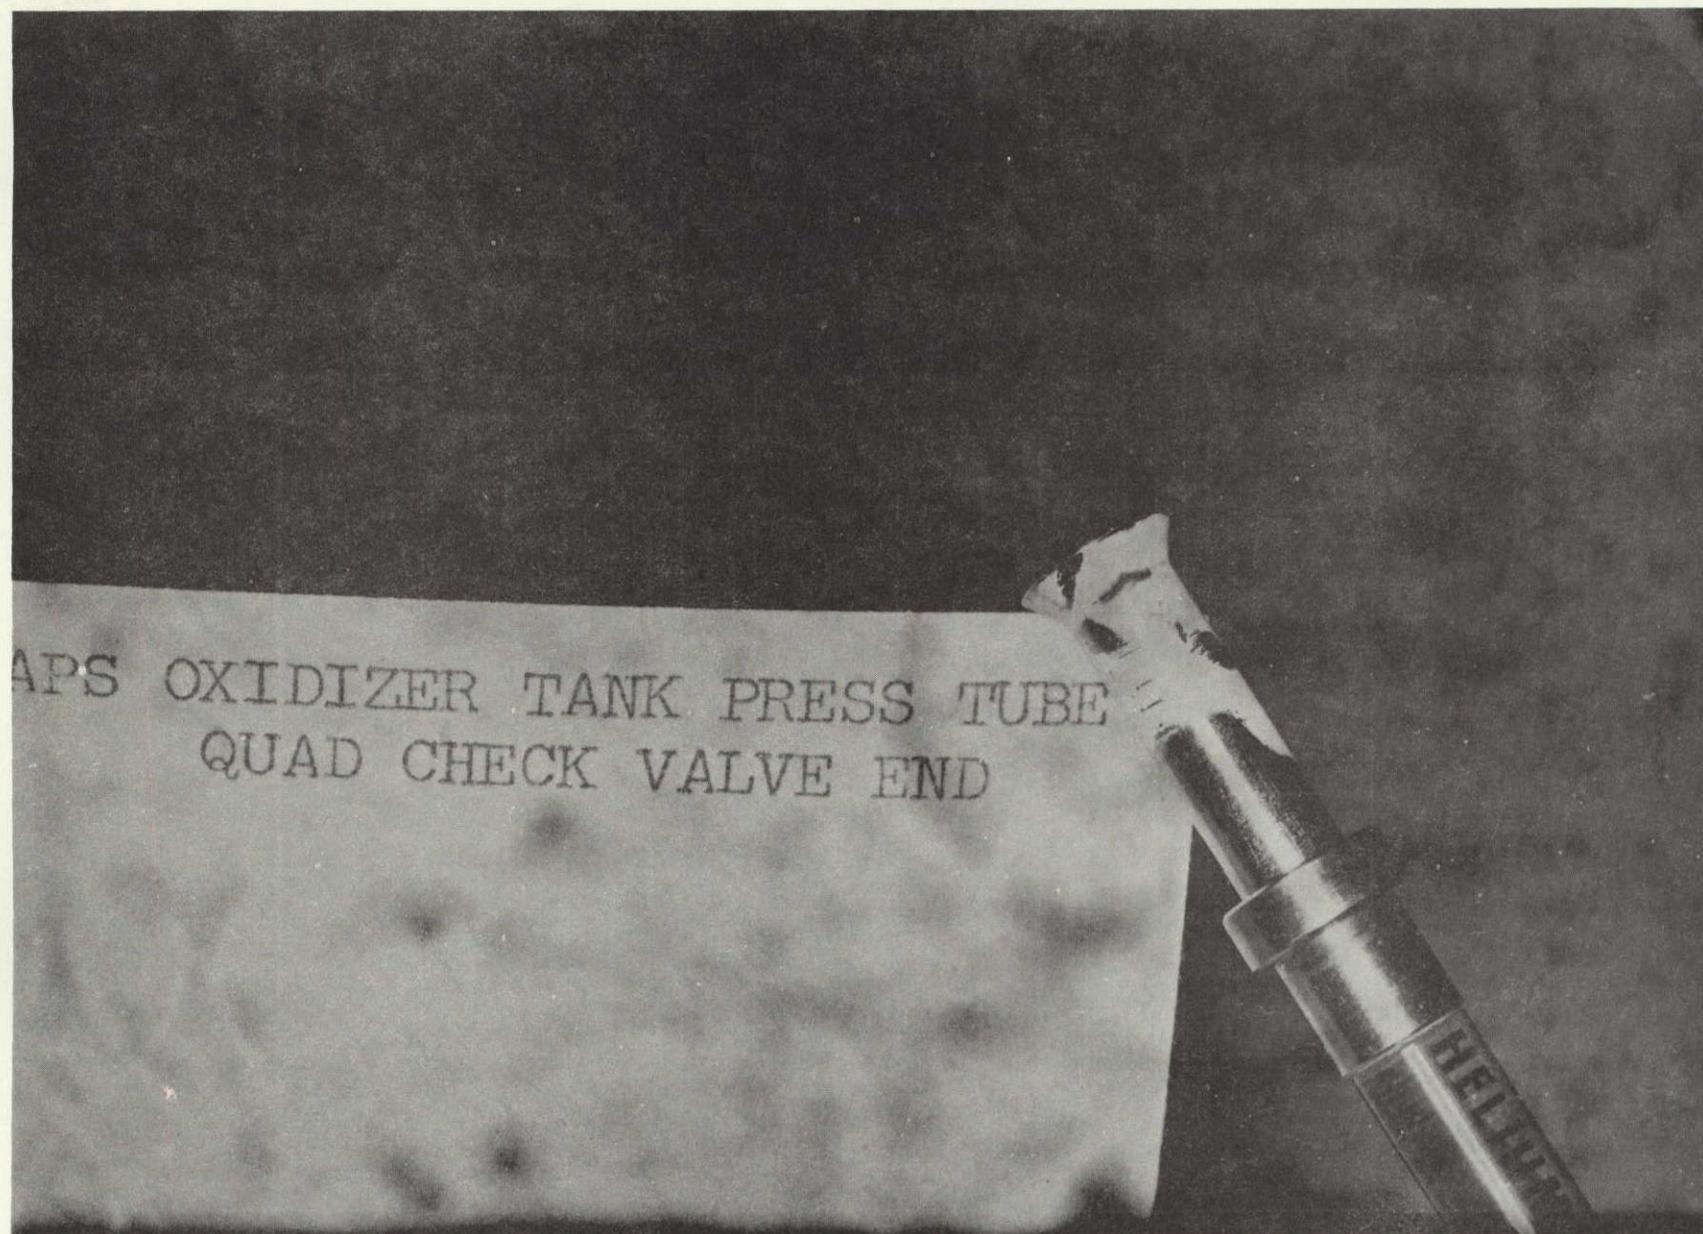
Helium Pressurization Tube Assembly (Sheet 2 of 2)
